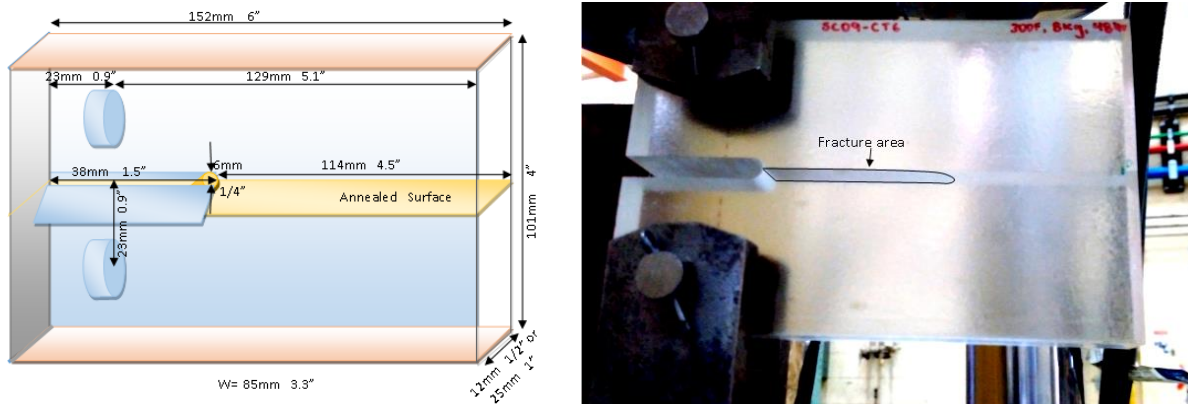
Left, schematic of modified CT testing specimen at the end of preparation. Right, SC09-CT6 specimen being tested. Fractured interface highlighted from the notch edge moving towards the annealed end.
